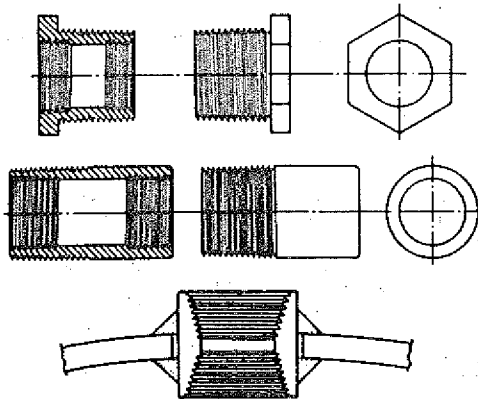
TYPICAL BOILER BUSHINGS
